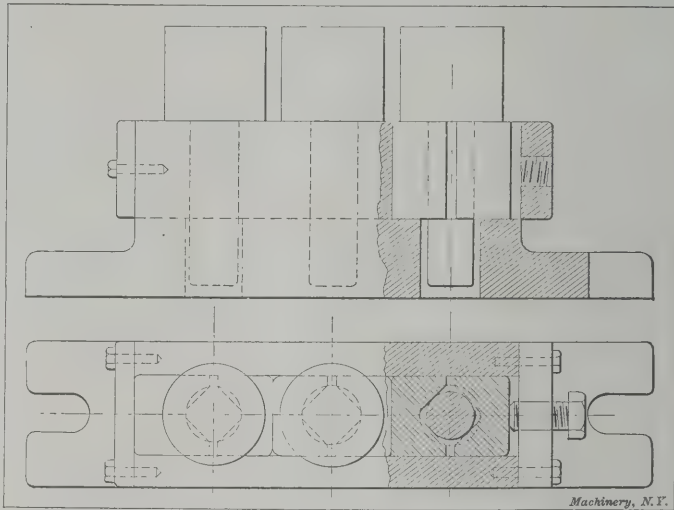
Fixture which will hold a Number of Pieces, Fig. 1, properly, even though Diameters of Locating Parts vary
